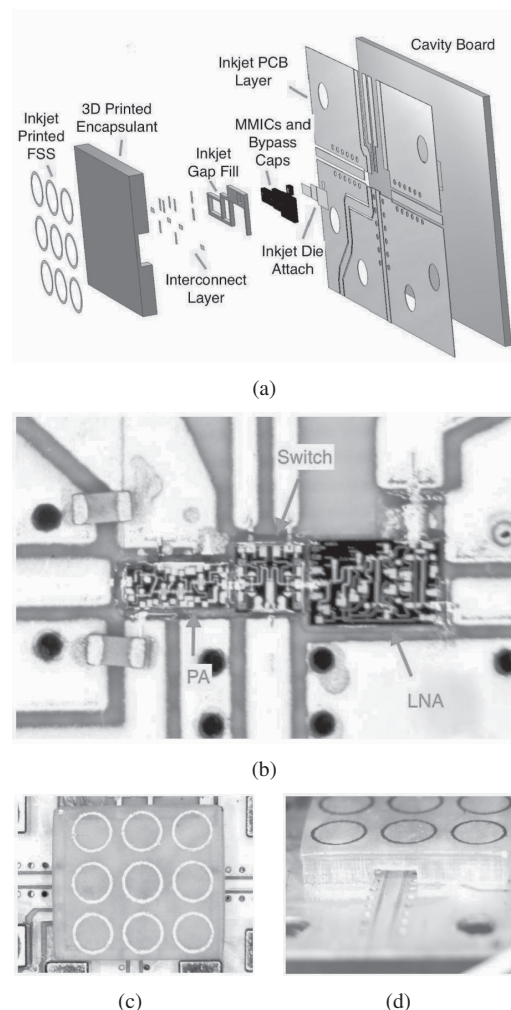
(a) Exploded view of the complete encapsulated RF front-end MCM with an additively manufactured multilayer structure. (b) Non-encapsulated mm-wave front-end MCM fabricated using inkjet printing (c) 24-GHz FSS inkjet printed on top of the 3-D printed encapsulation. (d) Perspective image showing the cavity and the FSS-enabled “smart” encapsulation of the front-end MCM [11].
